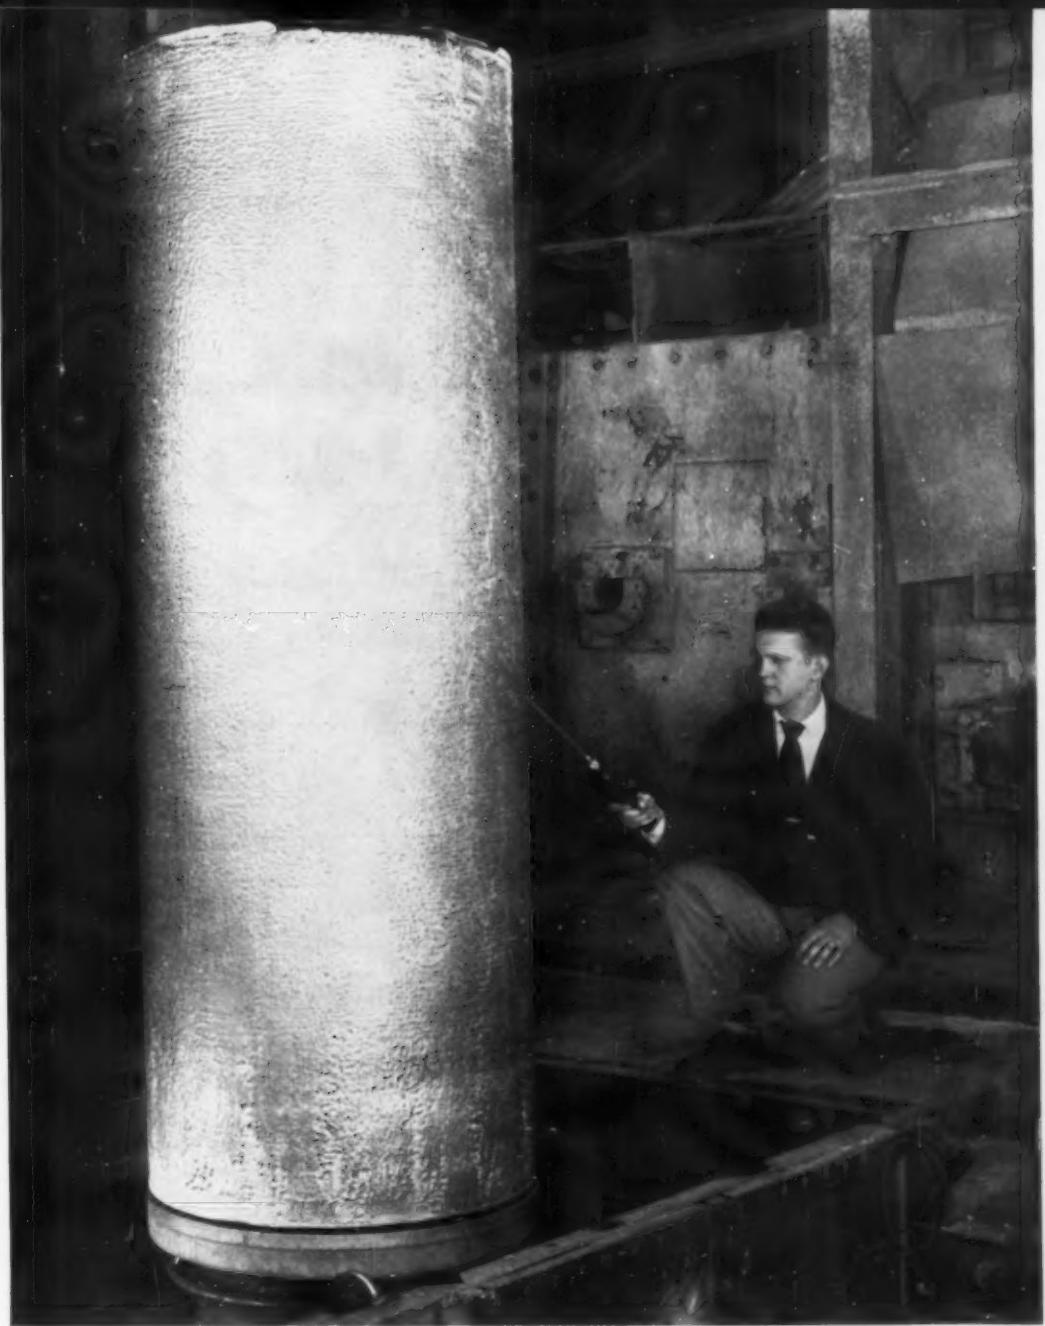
A 32-In. Diameter 7075 Alloy Ingot Immediately After Casting
